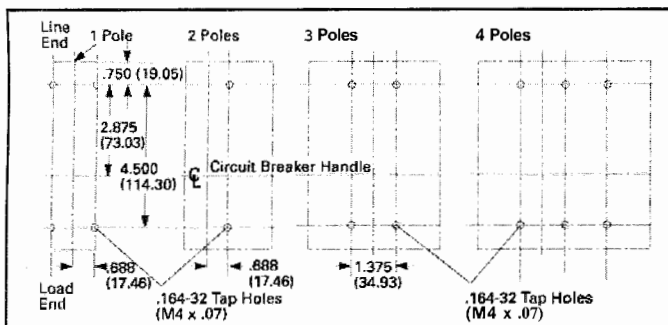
Circuit Breaker Mounting Bolt Drilling Plans
